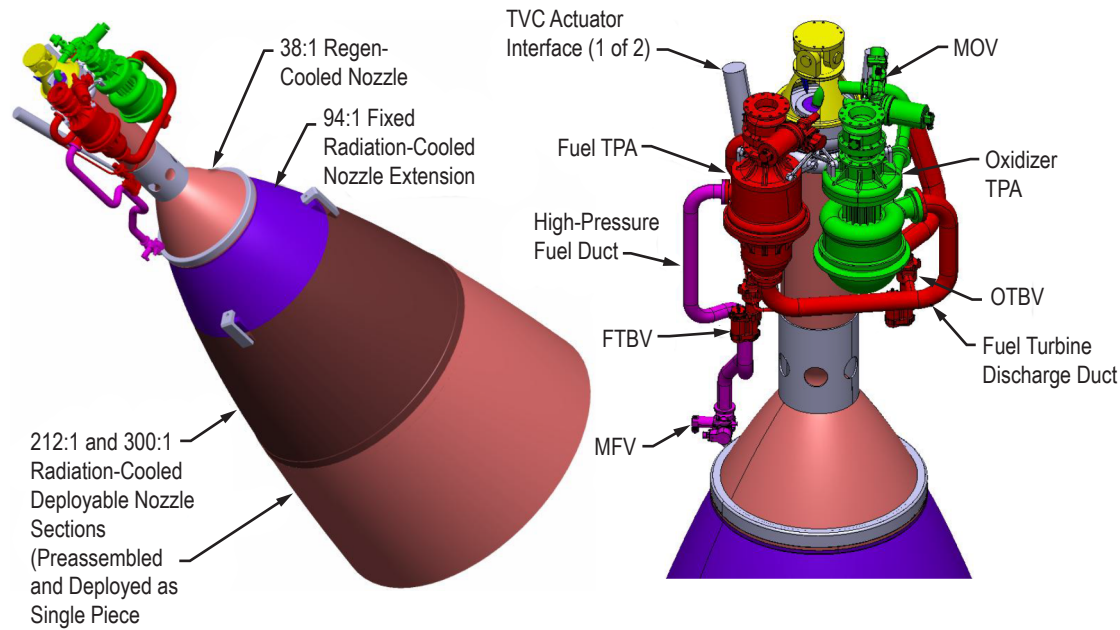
NGAS AUSEP POD closed expander engine layout and listing of components.
